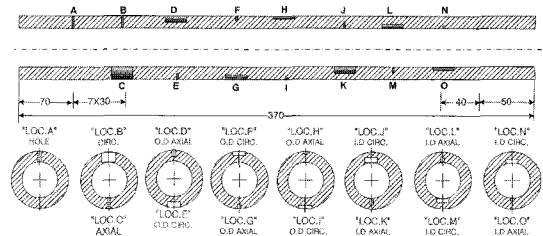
Test tube drawing for the steam generator ultrasonic testing experiment with artificial flaws
